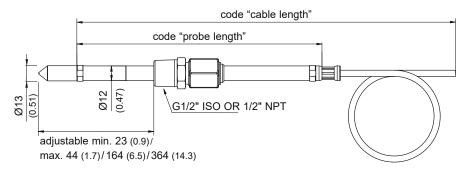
Type T10, pressure tight up to 20 bar (300 psi) and 180 °C (356 °F), with sliding fitting
